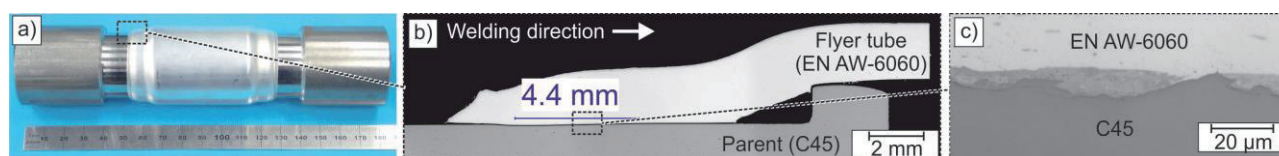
a) MPW-joint between aluminum and steel, b) cross section of the welded zone with 4.4 mm weld length, c) wavy interface between aluminum and steel
